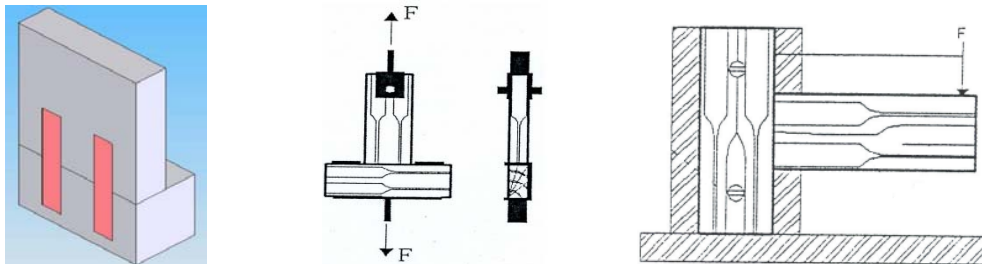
T-shaped joint specimen in the fitting screw (cutting out the middle joint). The dimensions of specimens (50 × 50 × 25 mm) and load directions for both tensile and bending tests.
